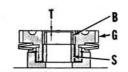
After installing spacer (S) and inner bearing race (B) into forward or reverse gear (G), measure distance (T) to determine correct shim thickness as outlined in text.
